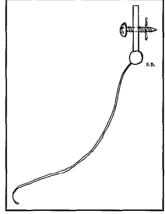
Small piece of paper or cardboard keeps screw from falling out.
